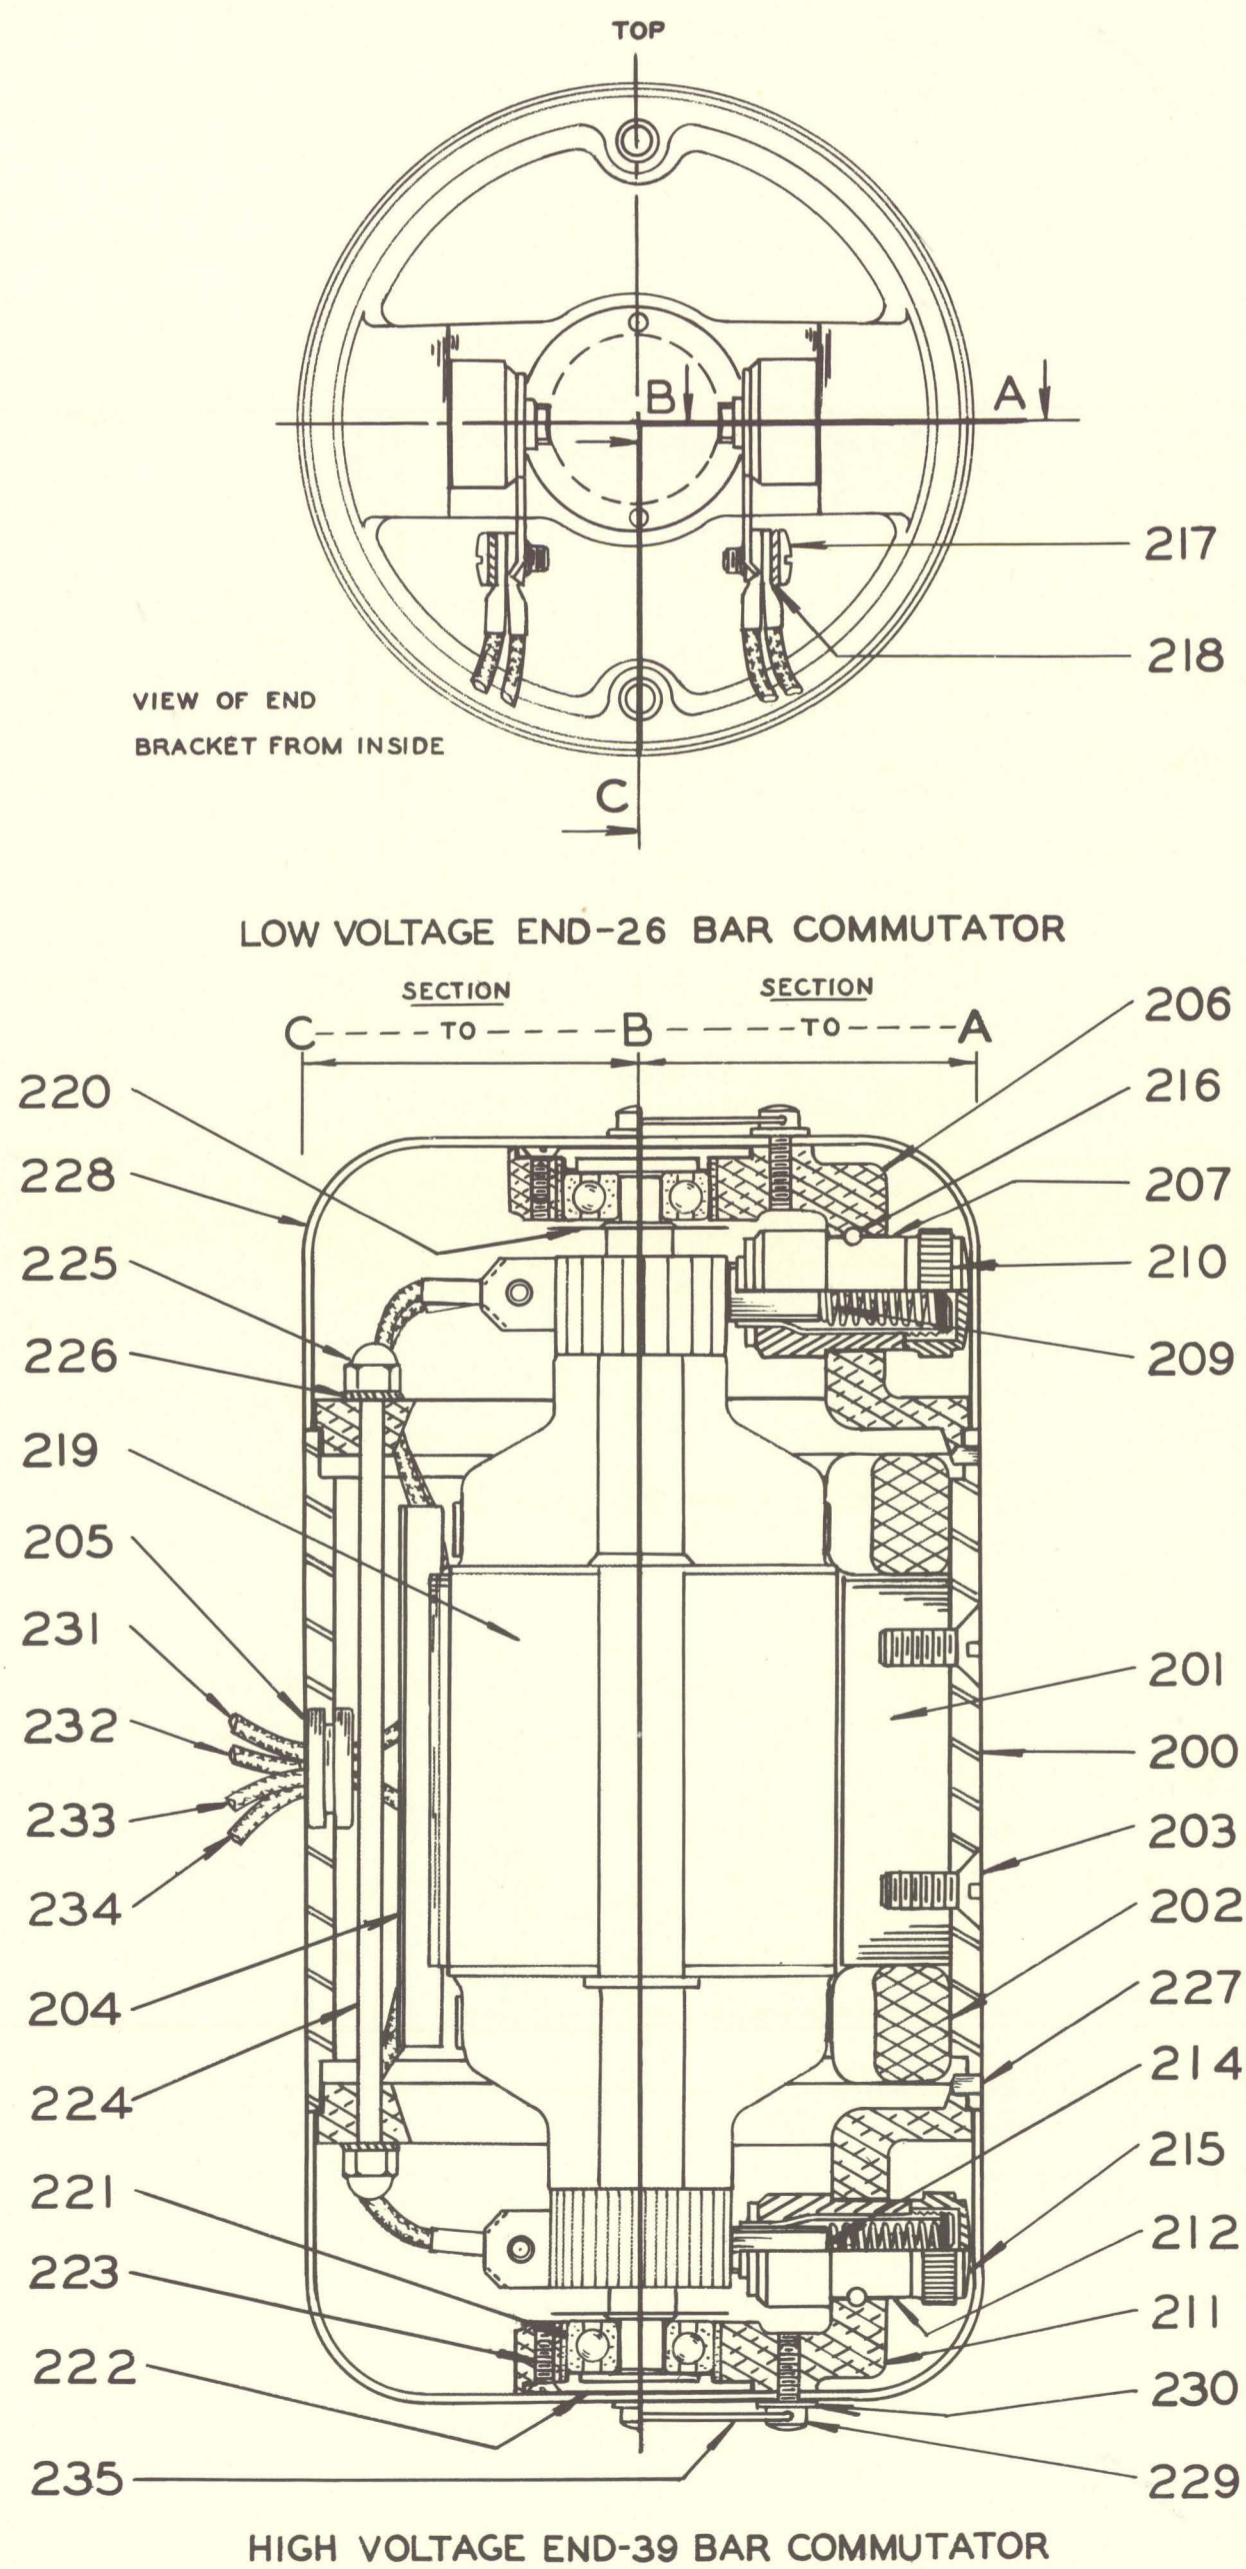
Dynamotor for Dynamotor Unit, Type BD-AK-83
